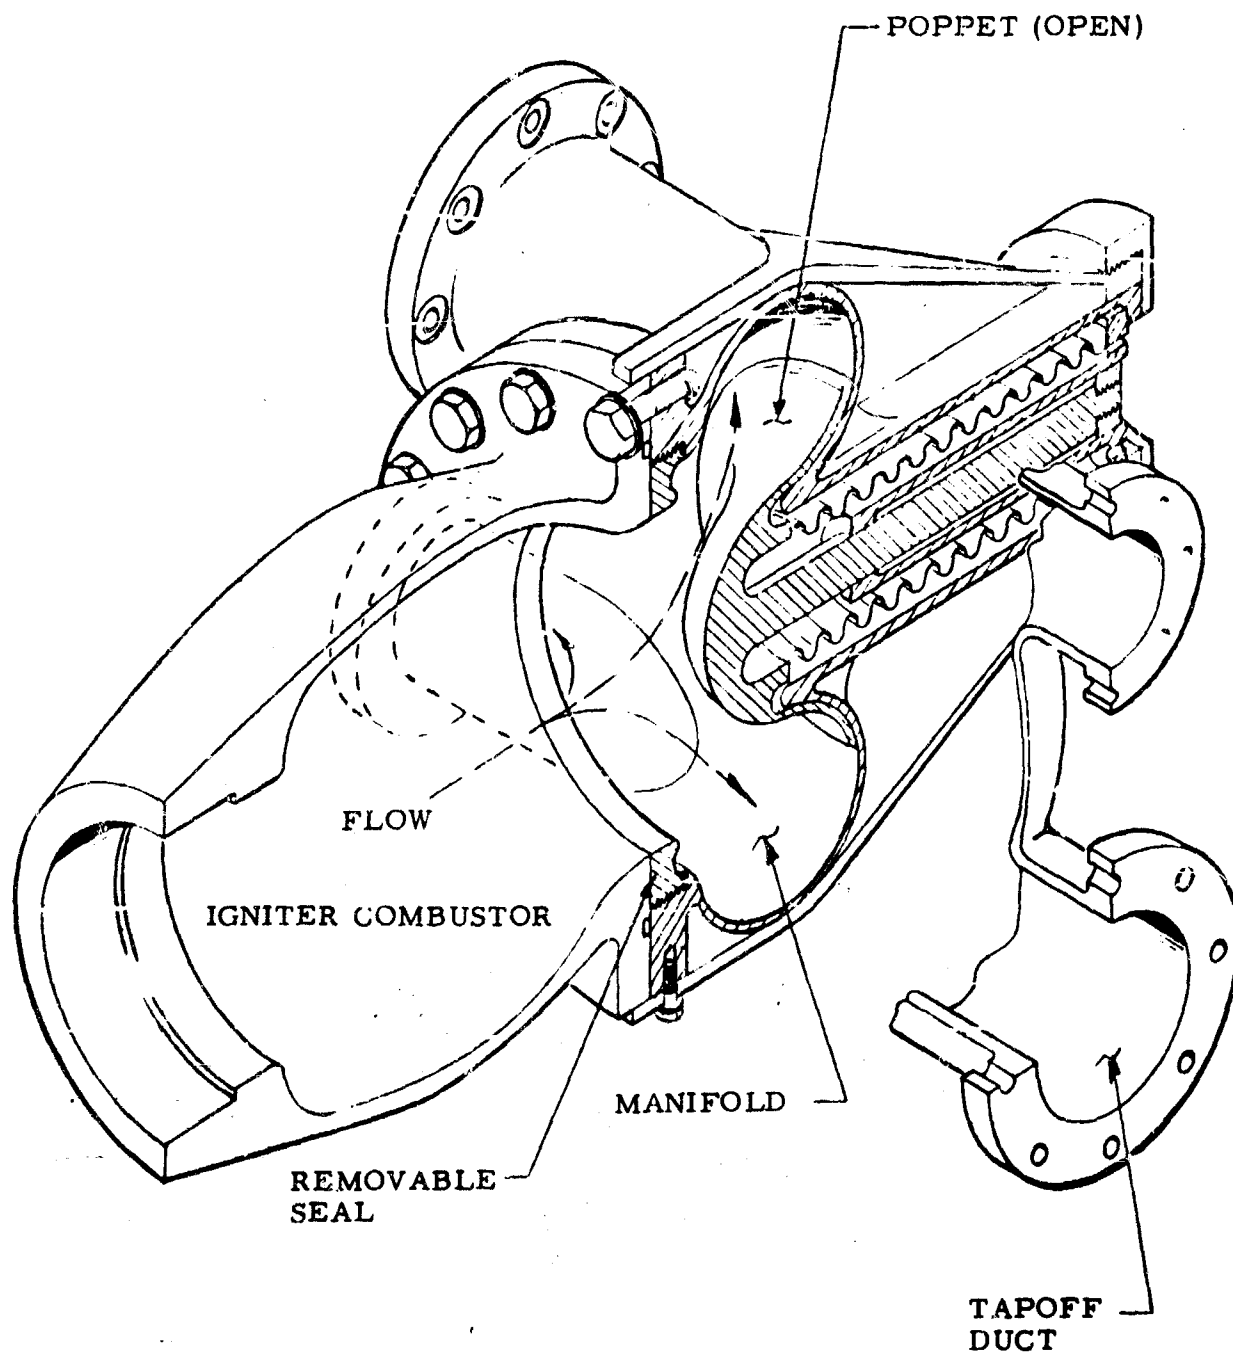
Igniter Hot-Gas and Isolation Valve/Manifold Assembly
